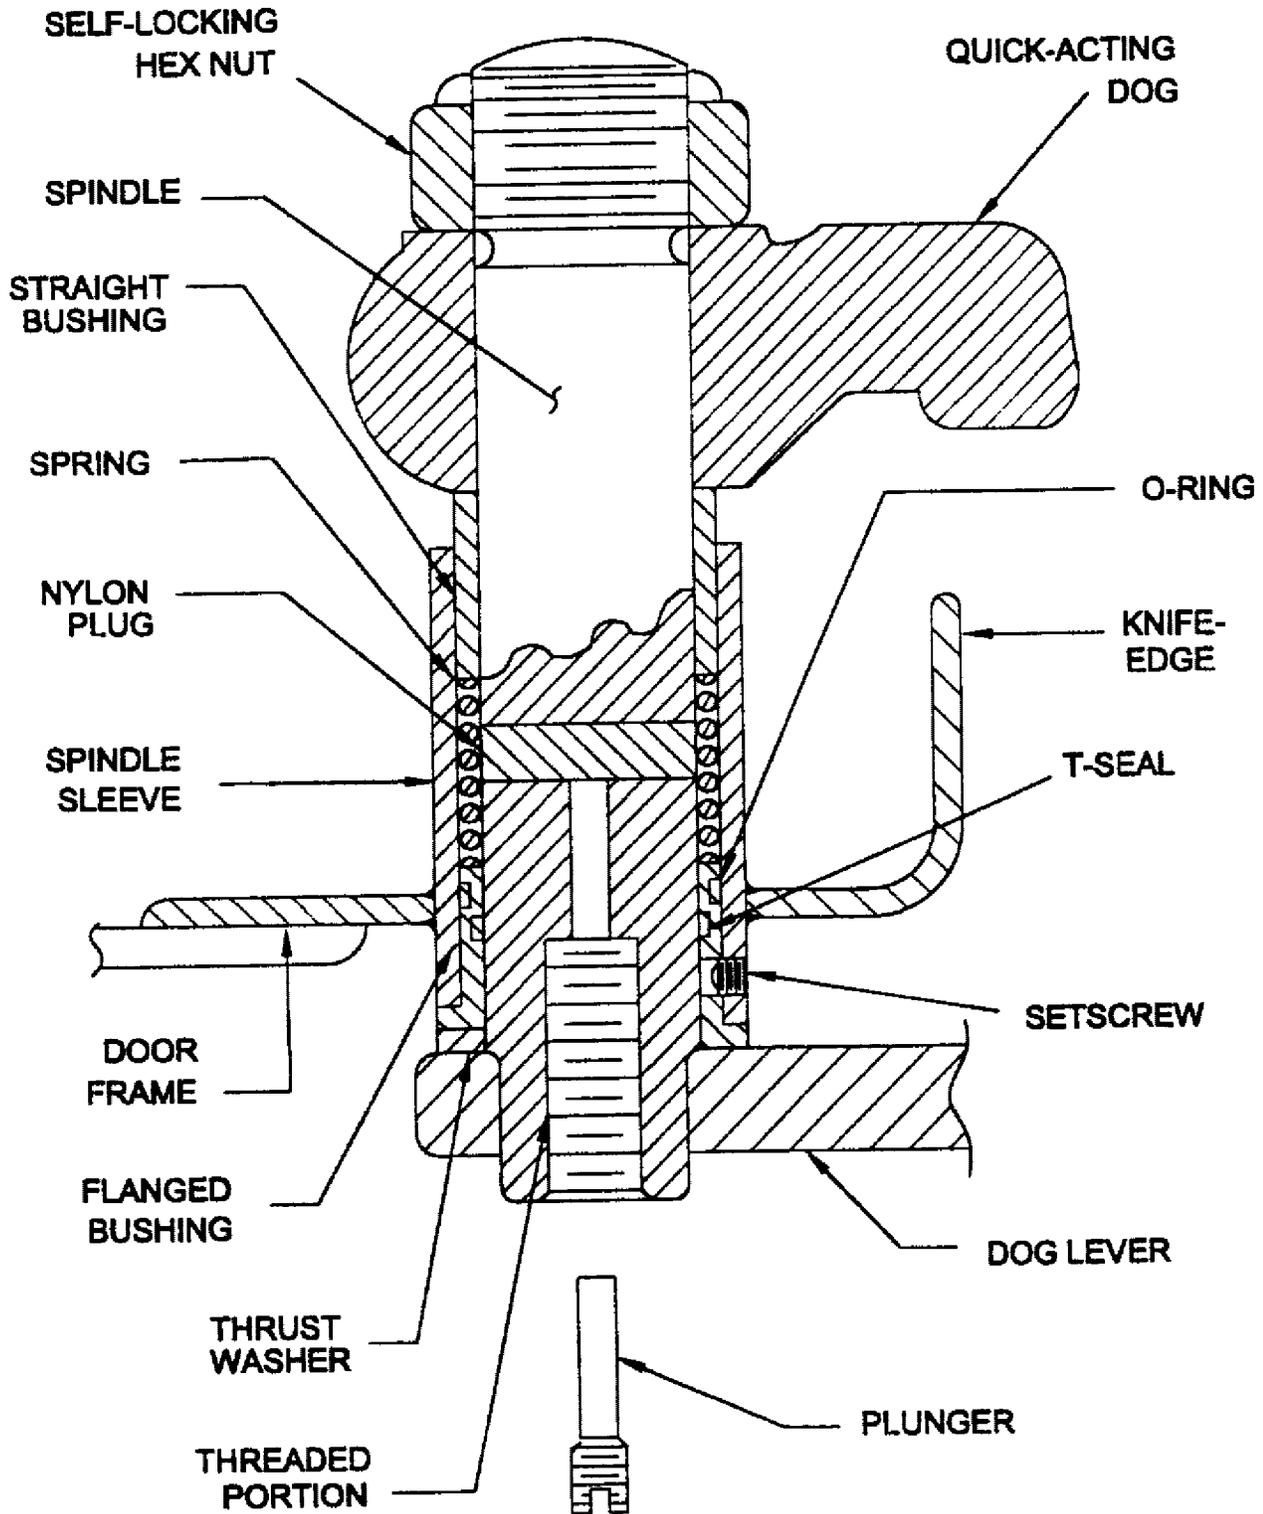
Quick-Acting Door Dog Assembly (Cross Section View) Modified by MACHALT 167-31004 (ECP-444)
